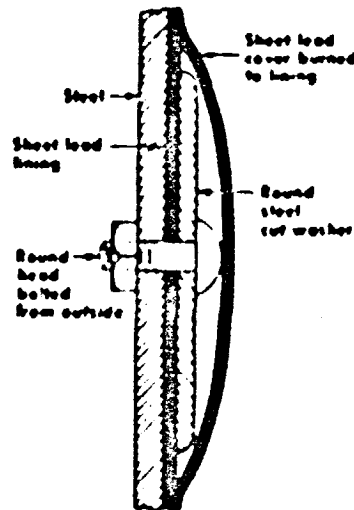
Bolt-type fastening of sheet lead lining to steel structure.
